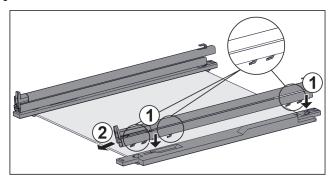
Glass shelf with rails and retaining parts Install rail with damping mechanism:
